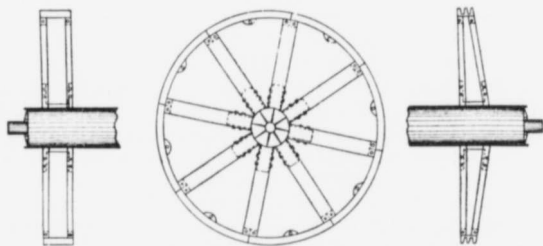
Detailed drawing of steel bull wheels: consisting of a full side view of the grooved wheel in the centre; on the right, an edge view of the brake wheel, and on the left, an edge view of the tug rope wheel.
